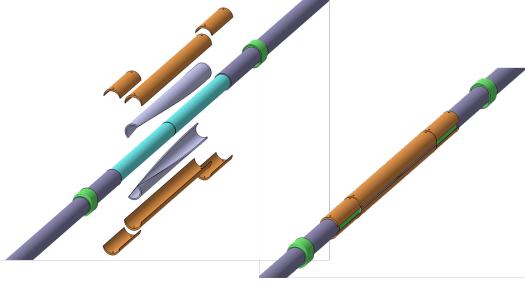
Bus joint in CS—exploded view (left) and the assembly (right) before welding the close out case.
